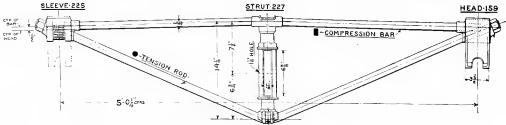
Diamond Adjustable Brake Beam for Heavy Freight Service. Chicago Railway Equipment Company.
